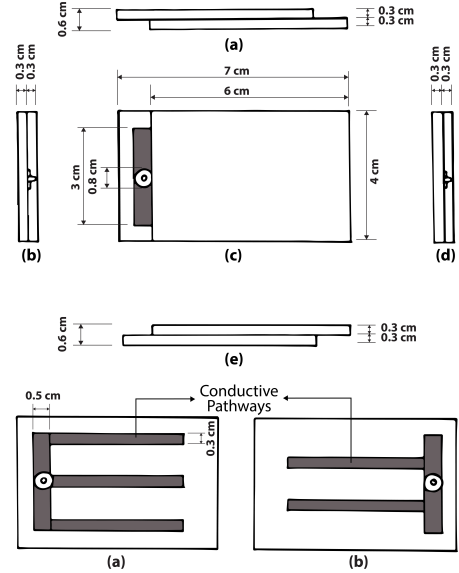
Top image:* (a) top view (b) left view (c) front view (d) right view (e) bottom view of the isolated Velostat sensor, *Bottom image:* Complementary conductive path built inside the sensor: (a) Lower insulation layer, (b) Upper insulation layer
